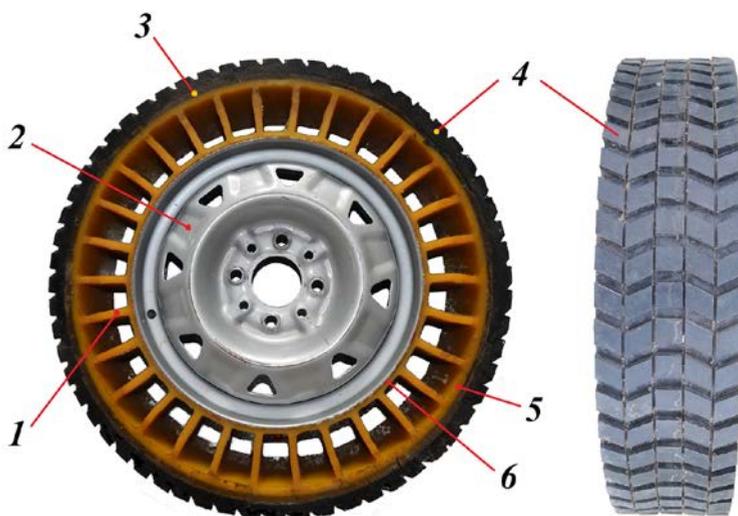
Automobile wheel with non-pneumatic tyre of elastic polymeric materials: 1 - flexible spokes; 2 - standard 5JX13H2 disk wheel with a deep edge-free band; 3 - supporting ring; 4 - protector; 5 - fitting ring; 6 - mounting ring.
